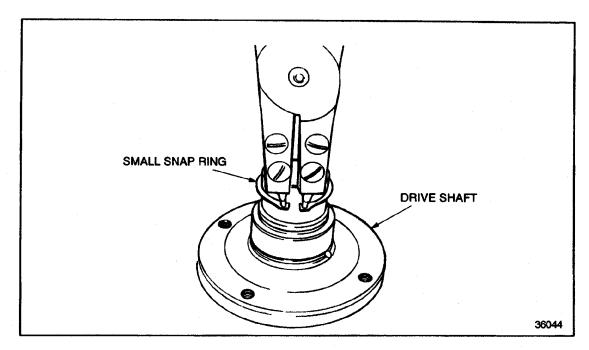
Roller Bearing Inner Race Snap Ring Removal
